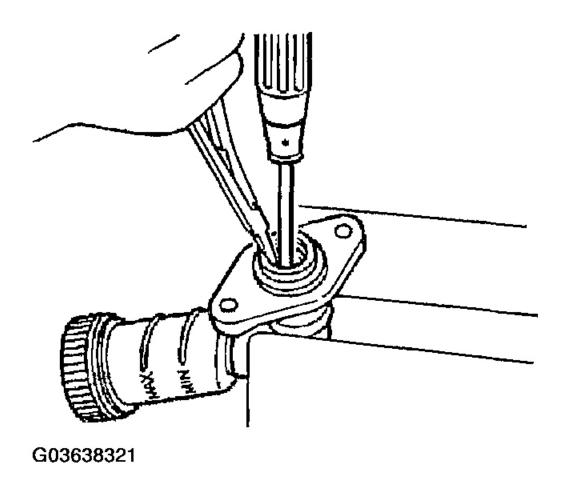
Removing Snap Ring Using Screwdriver Courtesy of MAZDA MOTORS CORP.
